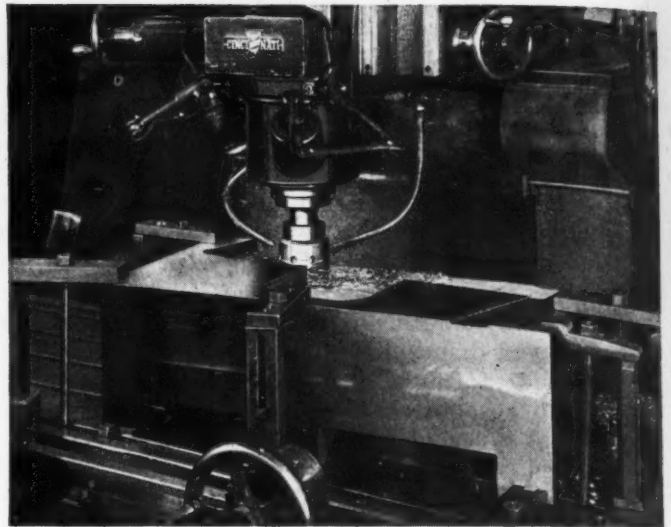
Roughing out Aircraft Wing Hinge with a 5-inch Diameter Inserted-tooth End-mill
